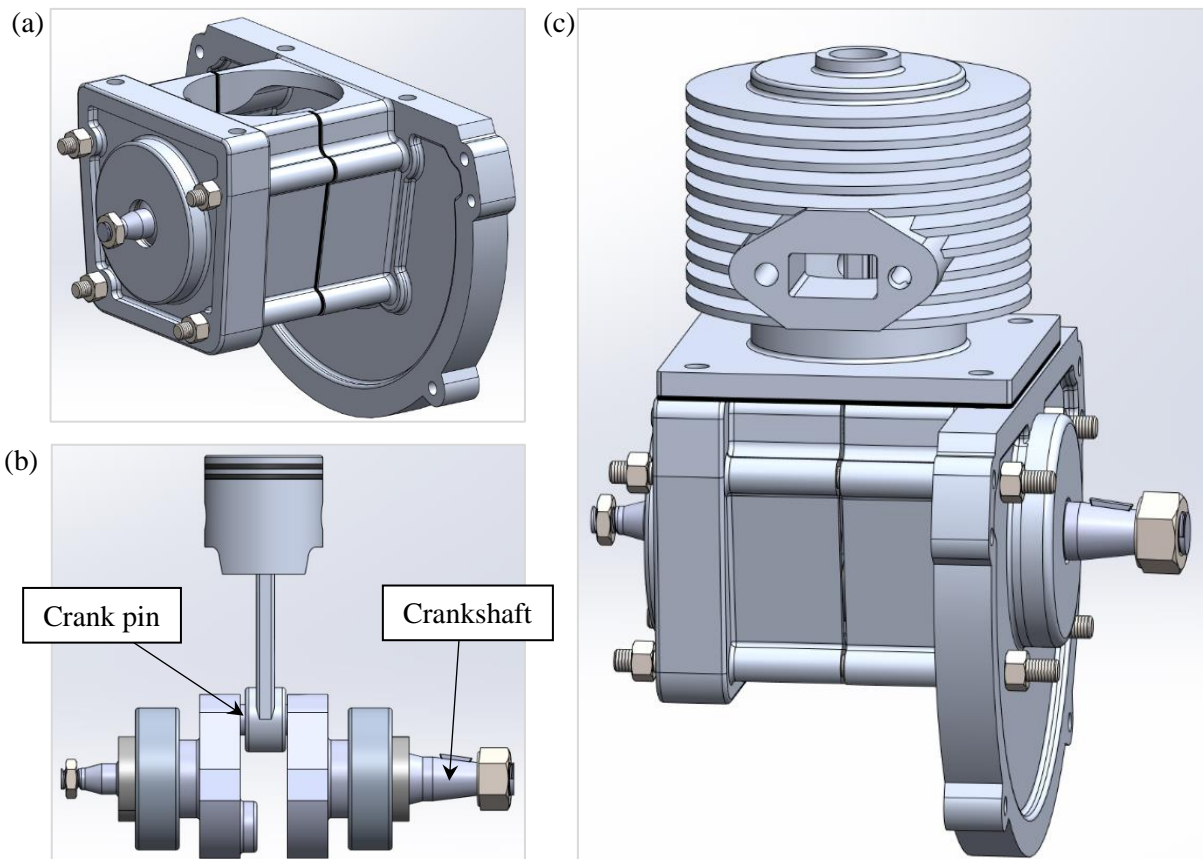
(a) Final design of the crankcase (achieved 8.7% weight reduction) (b) Assembly of piston, con-rod, crank pin, crankshaft and bearing (housed inside crankcase) (c) Final design of 2-stroke engine
